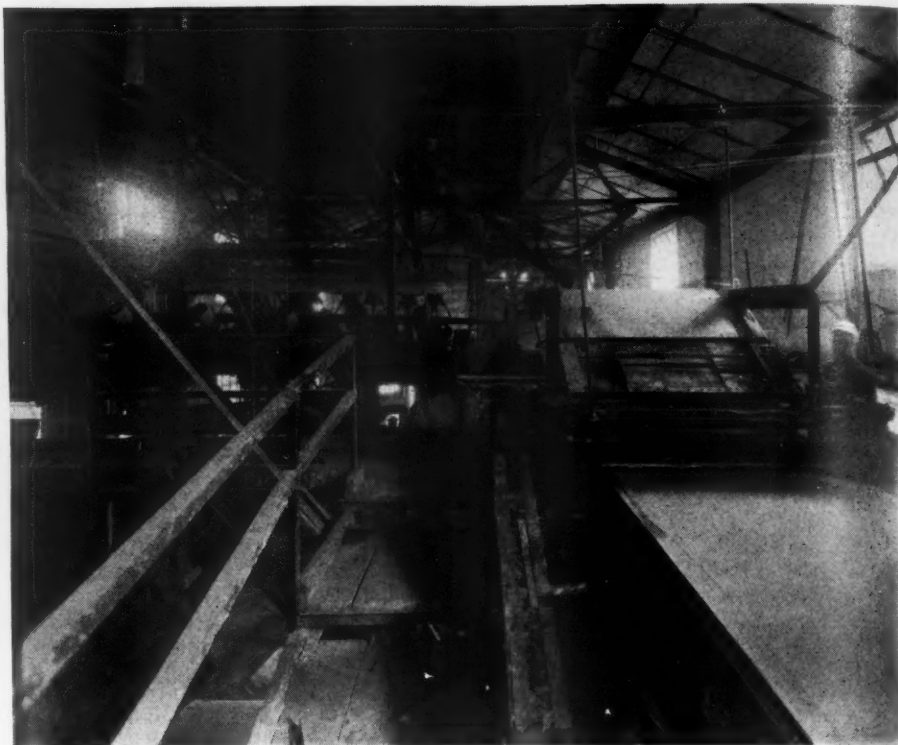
Continuous type of wall board machine. The conveyor in left center brings the plaster to the machine
